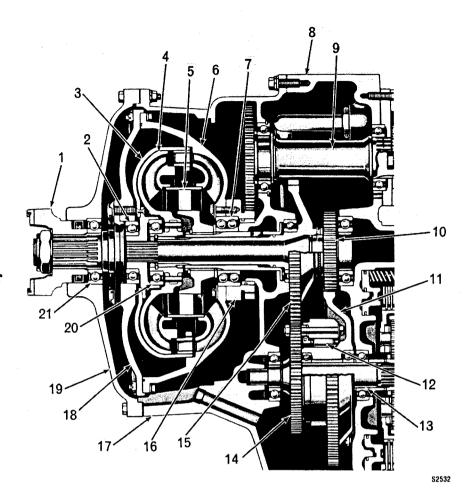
Typical twin-turbine torque converter and converter gearing
